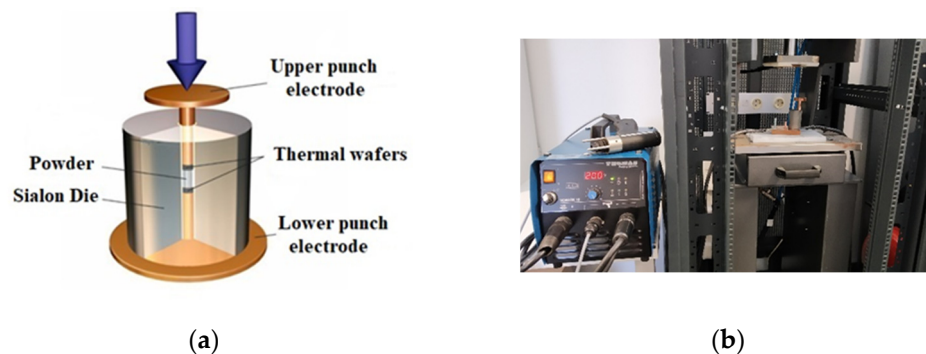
(a) Scheme of the sintering assembly, including electrodes and die, used in the CEDC experiments. (b) Stud welding equipment and pneumatic press used in the experiments.
